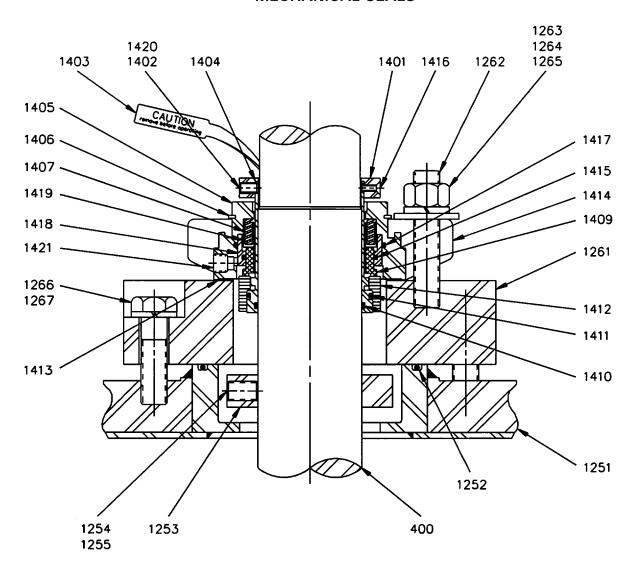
Model GTNC, Chesterton 155 Single Mechanical Seal 3" and 3-1/2" Shaft
